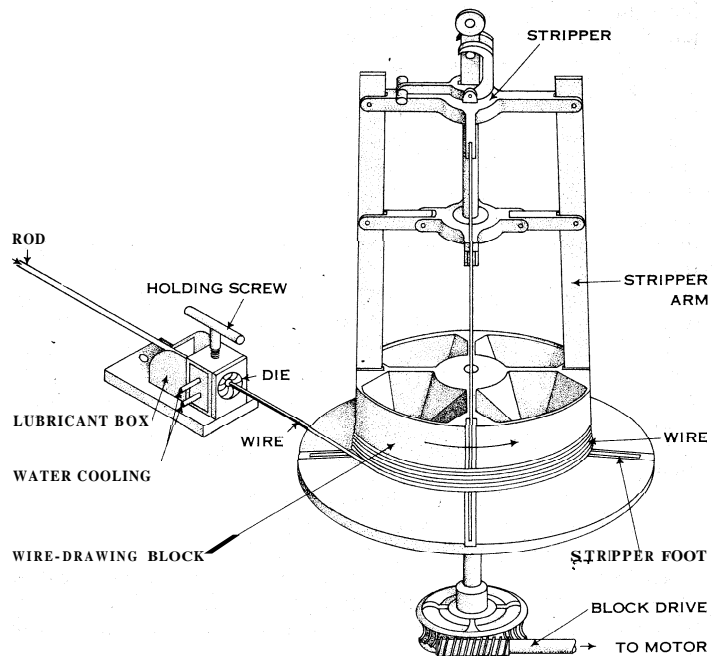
SINGLE-BLOCK WIRE-DRAWING UNIT AND STRIPPER
